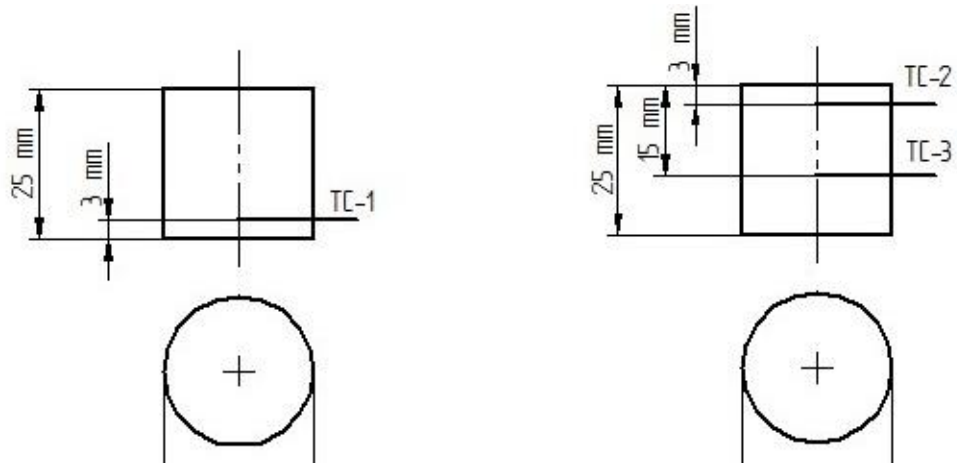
Dimensions of specimens with L/D of 1. TC-1, TC-2 and TC-3 represent thermocouple locations a) dimensions of source b) dimensions of sink
